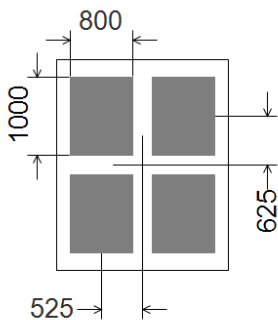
Stencil opening example for inner thermal pads (dimensions in μm)
